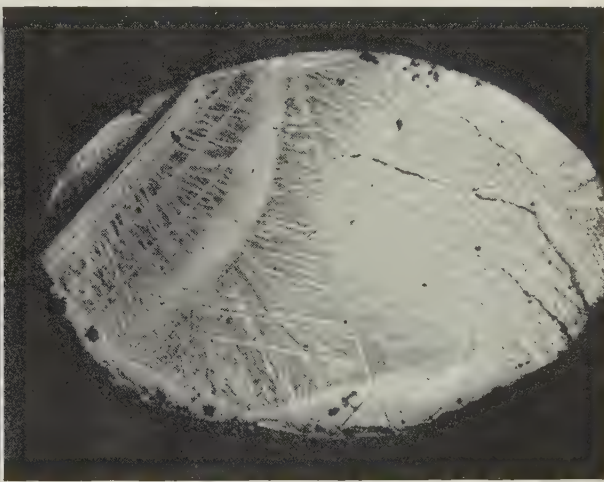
FIG. B.—River-line pattern, with steps arising over the whole of the fracture surface and converging in the direction of crack propagation.
